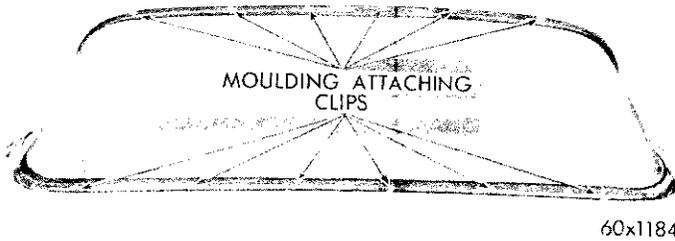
Removing or Installing Lower Rear Window Moulding (Imperial)
